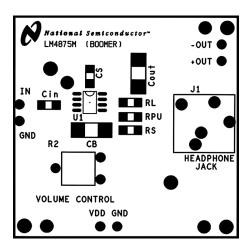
Recommended SOIC PC Board Layout: Component Side Silkscreen
